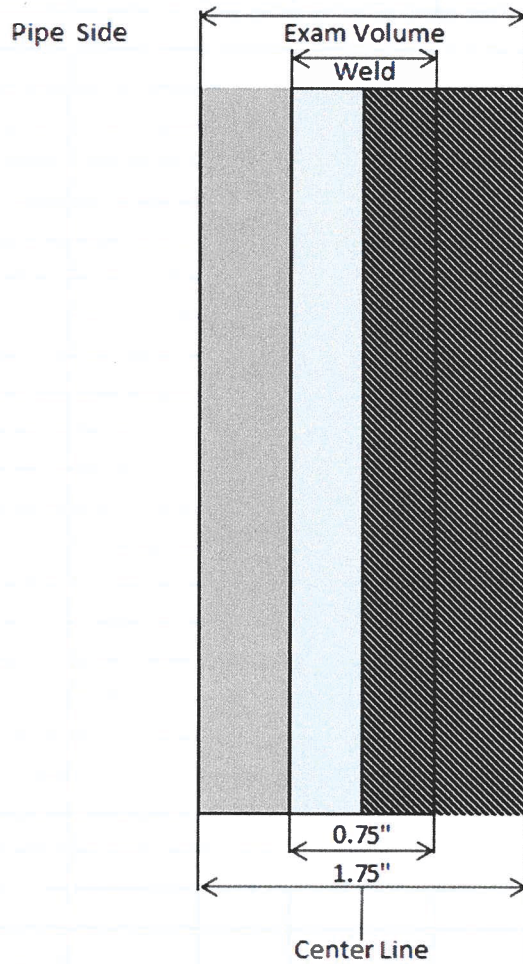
Figure G- Weld WCS-006B2-XI-FW011 Coverage (Pipe-to-Valve Weld)
